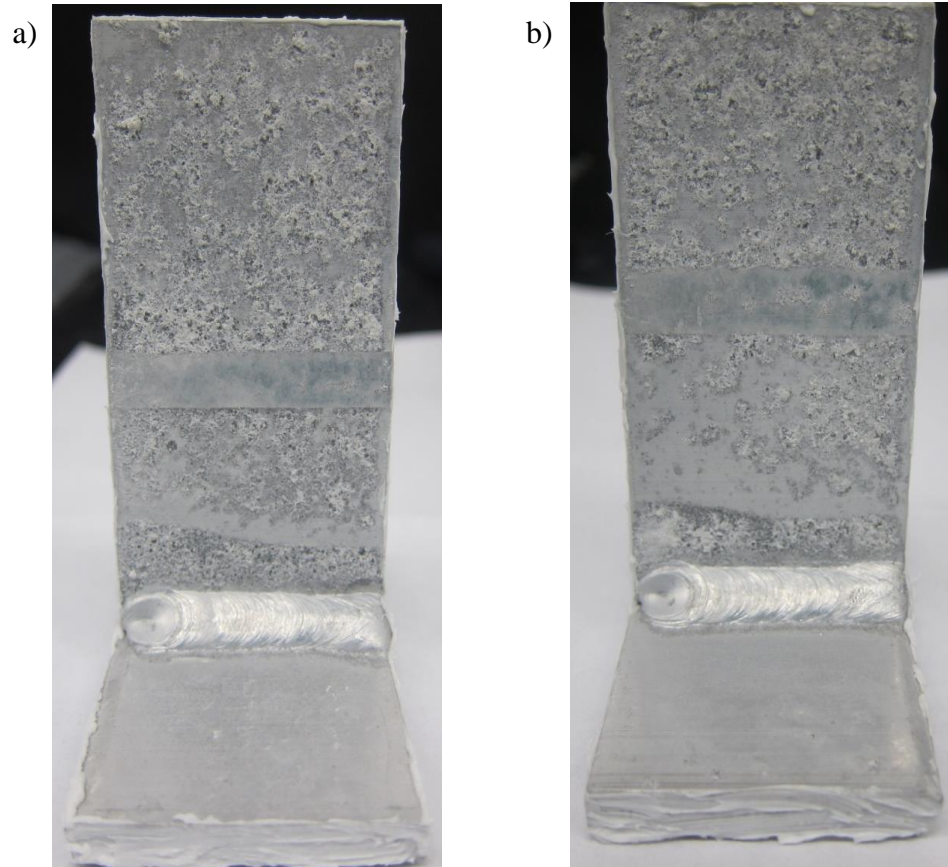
Duplicate samples of T-joint welded configuration H3 (ER5356/AA7003/≡) in the as-welded T6+PB condition.
